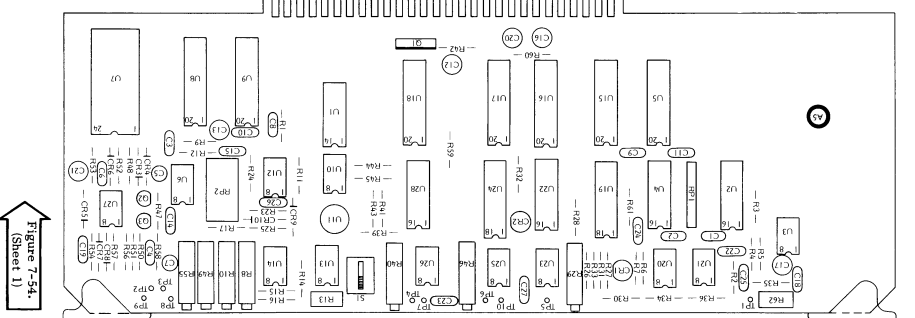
A5 PCB Parts Locator Diagram (Sheet 1)
